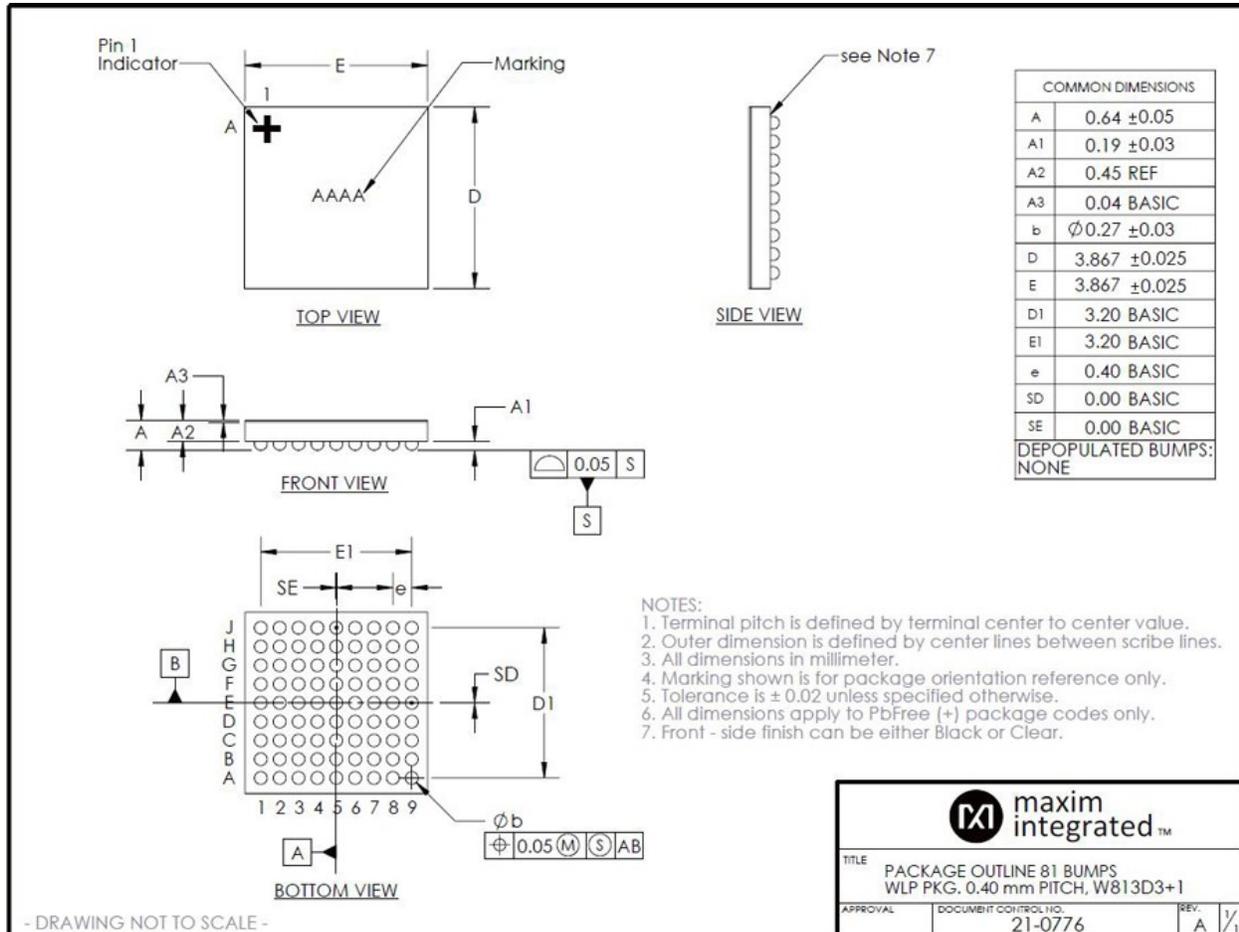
Package outline drawing of a 0.4mm pitch WLP.
